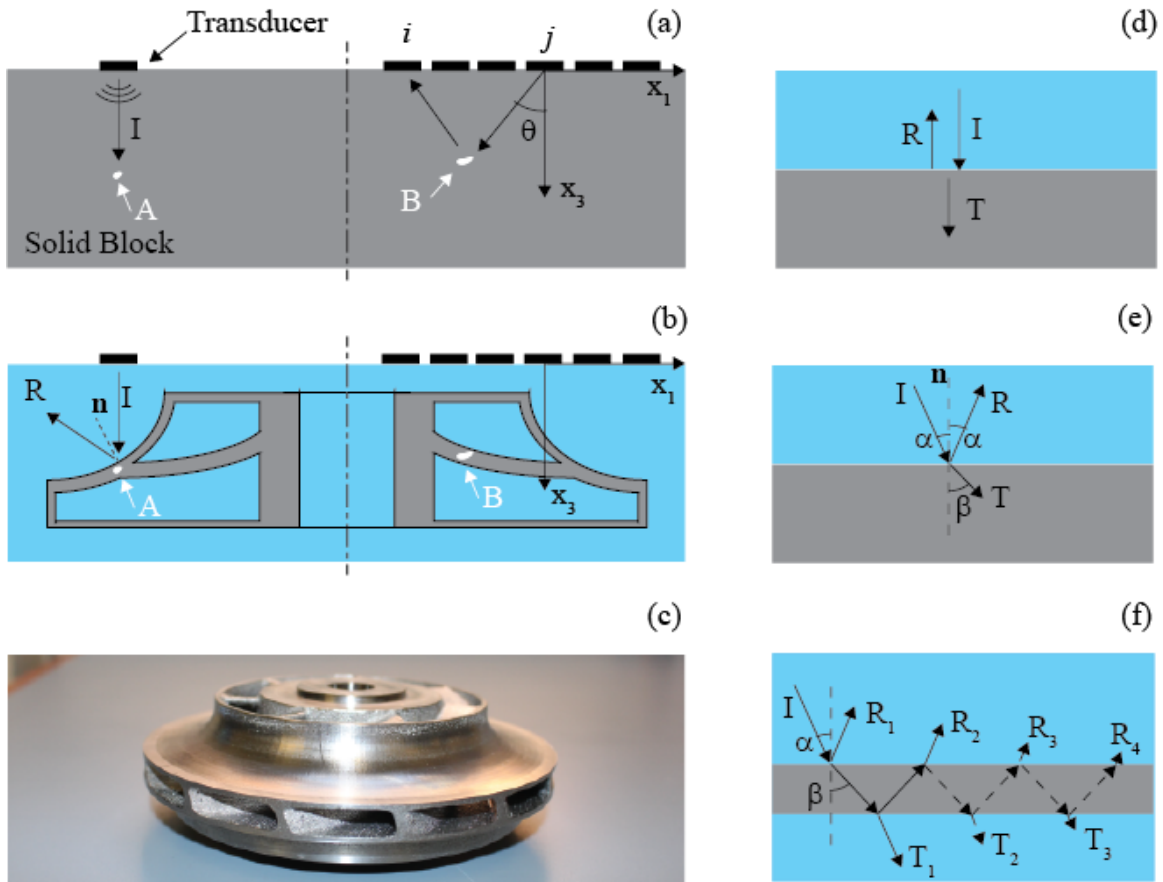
(a) Ideal conditions for ultrasonic testing (UT) with a single element probe or an array - the part is a solid cylinder containing two defects labeled A and B; (b) Schematic of a shrouded impeller *carved out* from the cylinder in (a); (c) Prototype 3-D printed impeller; (d) Reflection and transmission at normal incidence; (e) Refraction; (f) Scattering by a layer, the solid arrows are the primary reflected and transmitted waves while the dashed arrows are the internal multiples.
